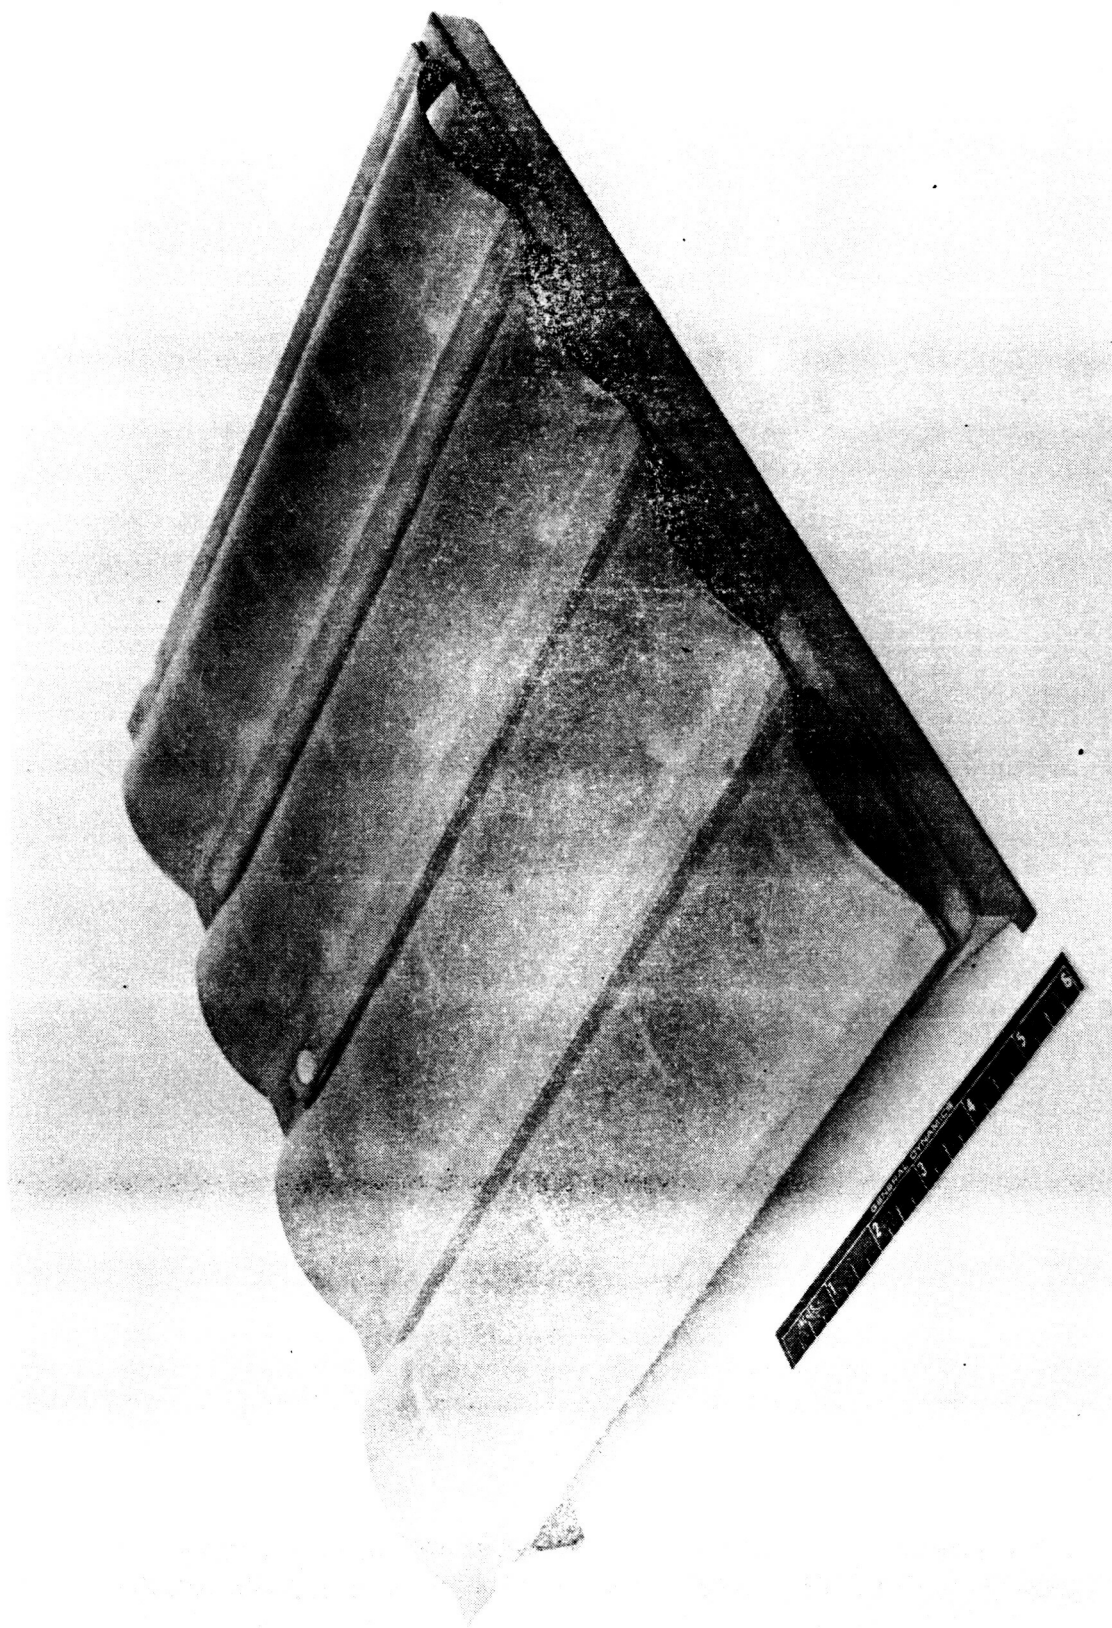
Exterior View of Brazed Cb-752 Open Corrugation Heat Shield (Photo No. 126974B)
